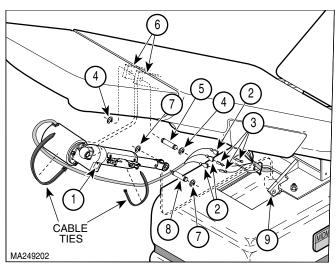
Tilt Actuator Assembly Removal / Installation
